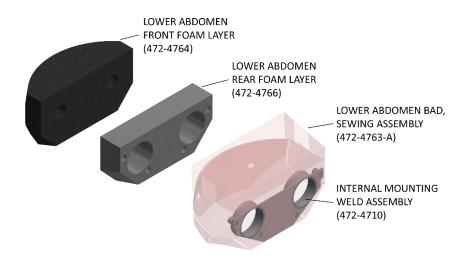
Internal Mounting Weld Assembly Positioned Properly Inside of the Bag
